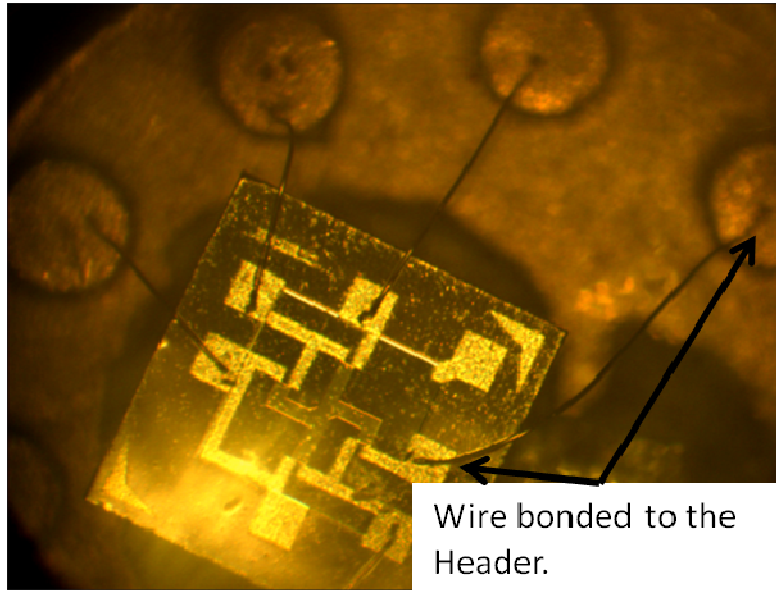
Bond Pads and wires on the MEMS pressure sensor of sample #2 after the micro-brazing welding process
